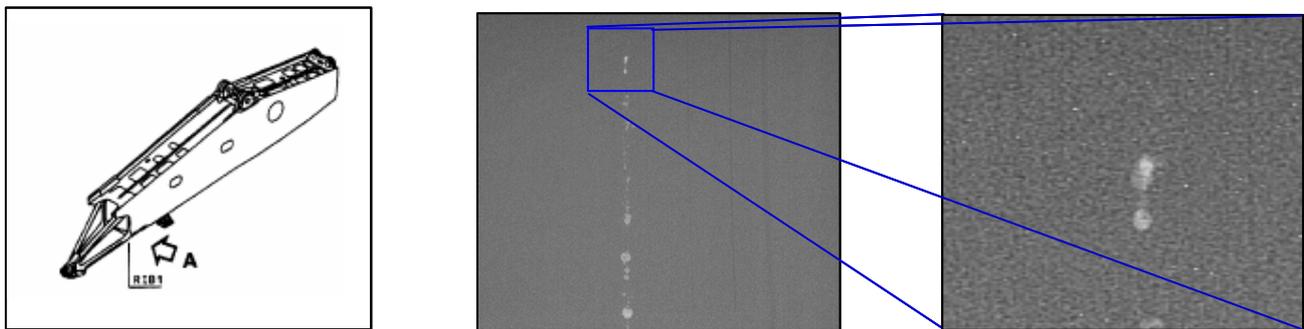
Engine spar 25mm titanium weld with flaws: zoomed image – gas holes of 0.8mm diameter.
